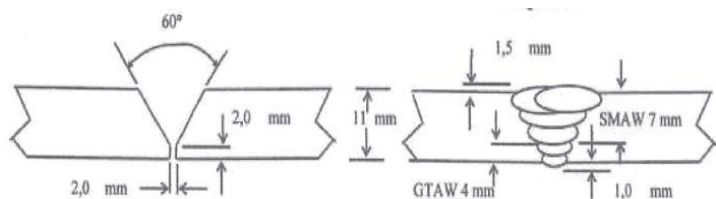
The groove design for combined GTAW and SMAW welding
